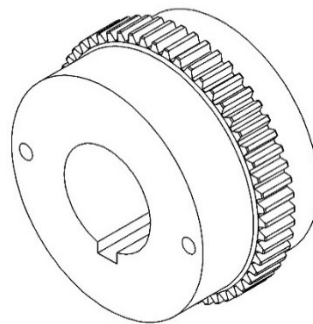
STEEL GEAR FLEX HUB (LONG END)
